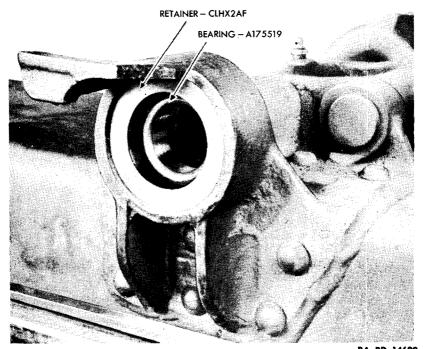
Location of Bushing and Right Bearing and Retainer in Worm and Worm Wheel Housing
